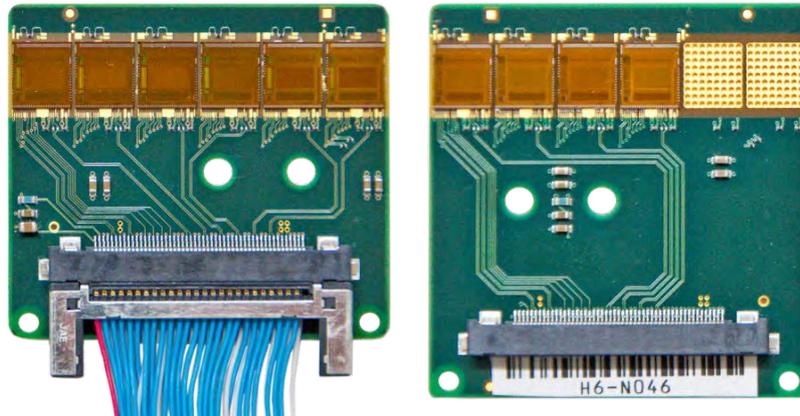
The hybrid boards used in layers 4/5/6 (left: forward *P*-side board with 6 APVs, and right: backward *N*-side board with 4 APVs).
